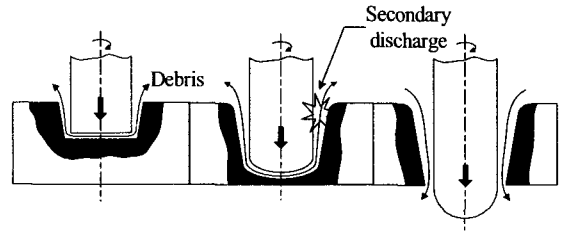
Secondary discharge during machining a hole by micro-EDM
